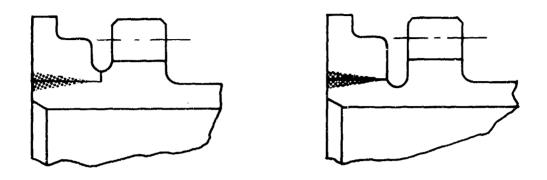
Initial and Modified Weld Root Relief.
